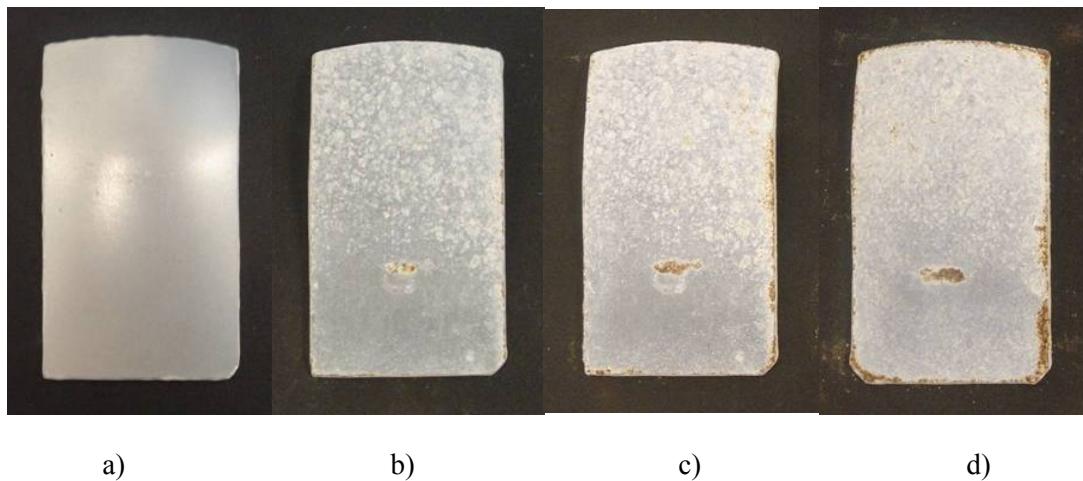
Corrosion progress of IF 1.77 mm non-welded deformed coupon after a) 0 b) 30 c) 45 and d) 60 cycles
